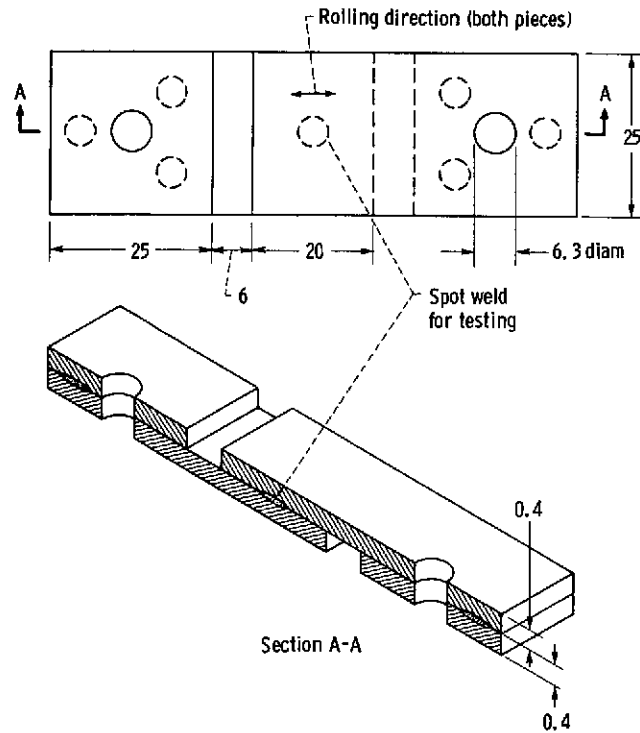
Resistance spot-weld lap joint specimen used for tensile shear and stress-rupture shear tests. Reinforcing tabs are spot welded to specimen to prevent failure at pin holes. Dimensions are in millimeters. Section A-A was used for metallographic examination of weld.
